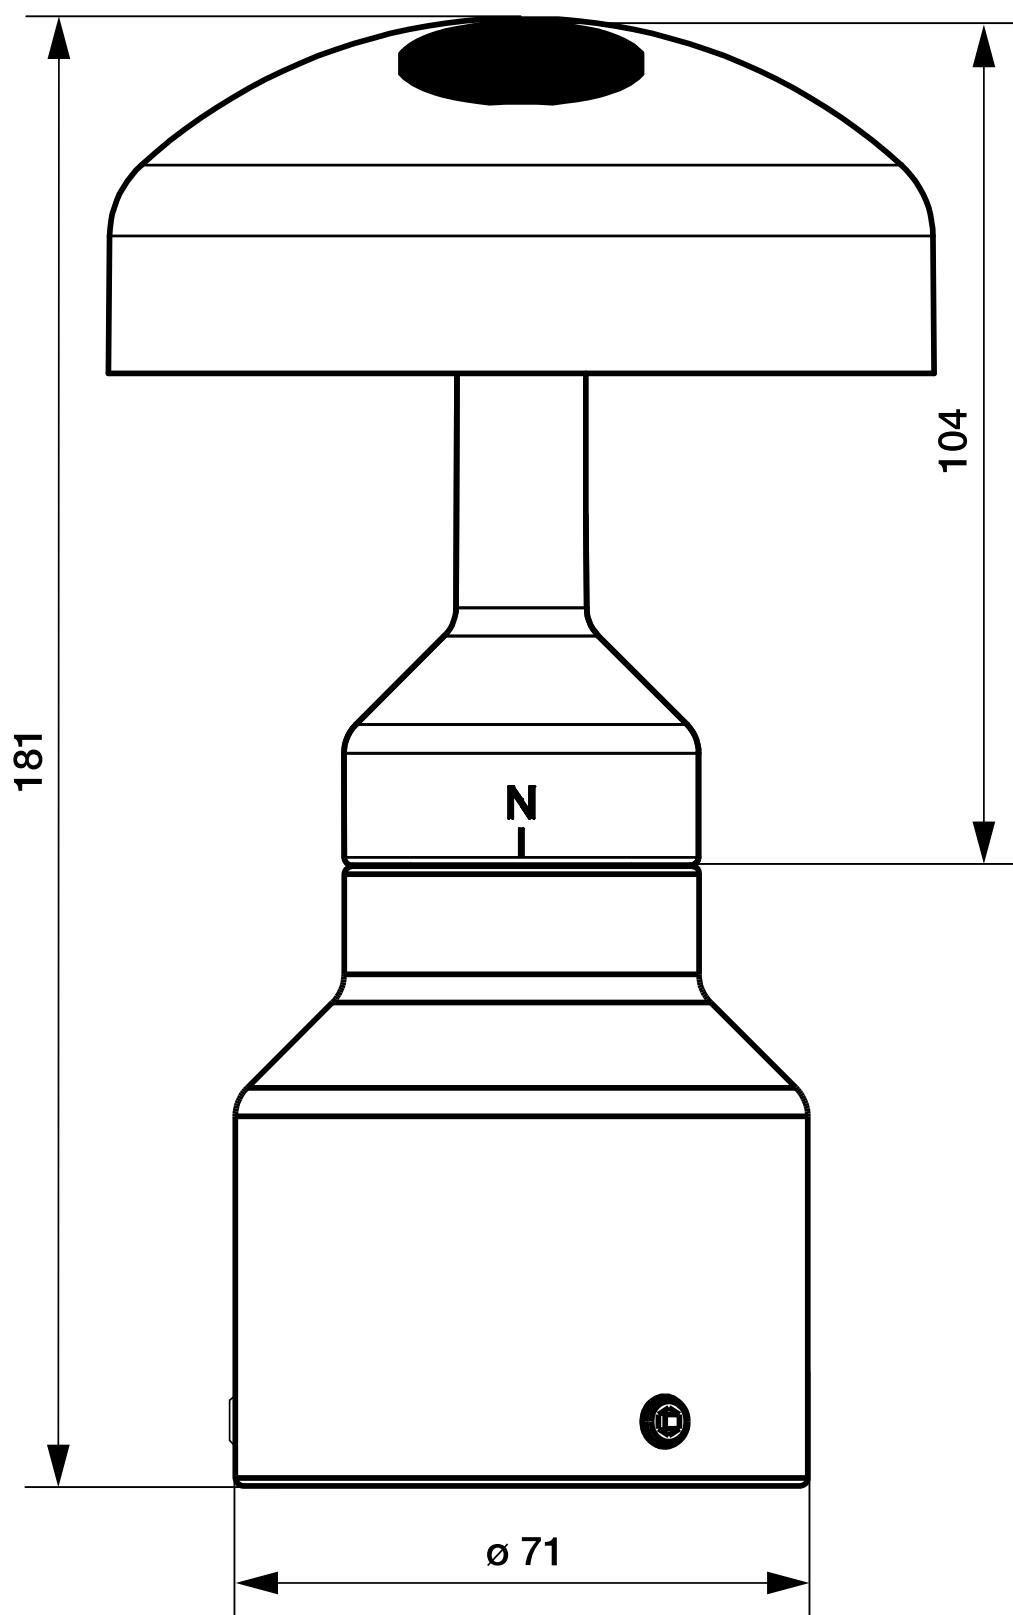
Dimension drawing for Weather Sensor WES/A 4.1.1 with Mast Mounting Adapter MA/Z 1.50.1
